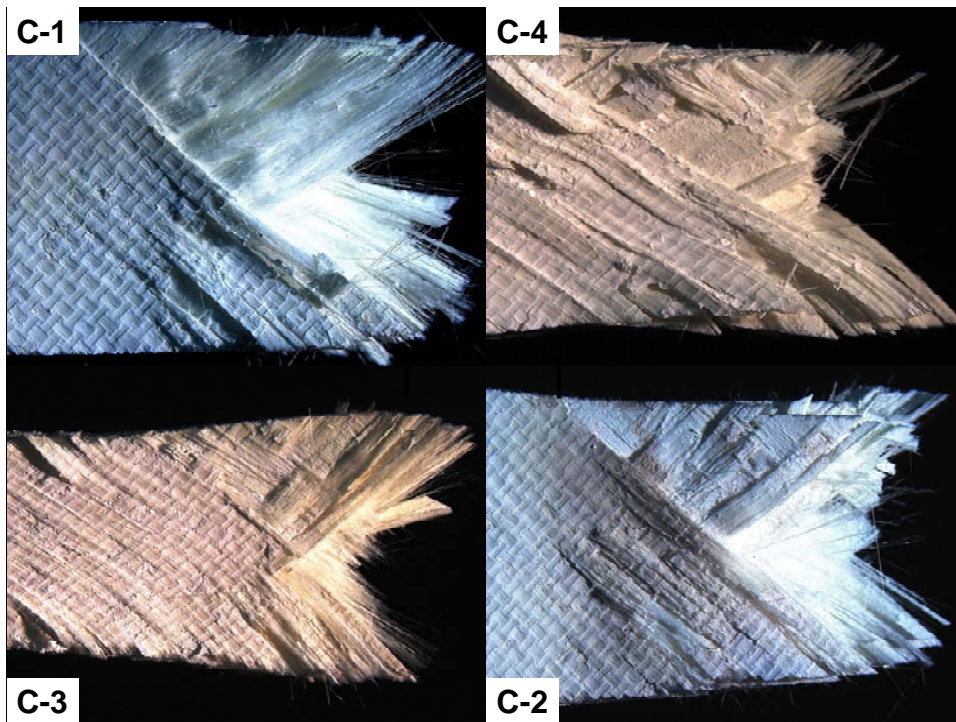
Fracture surfaces of N720/A specimens tested in creep at 1200°C in laboratory air.
